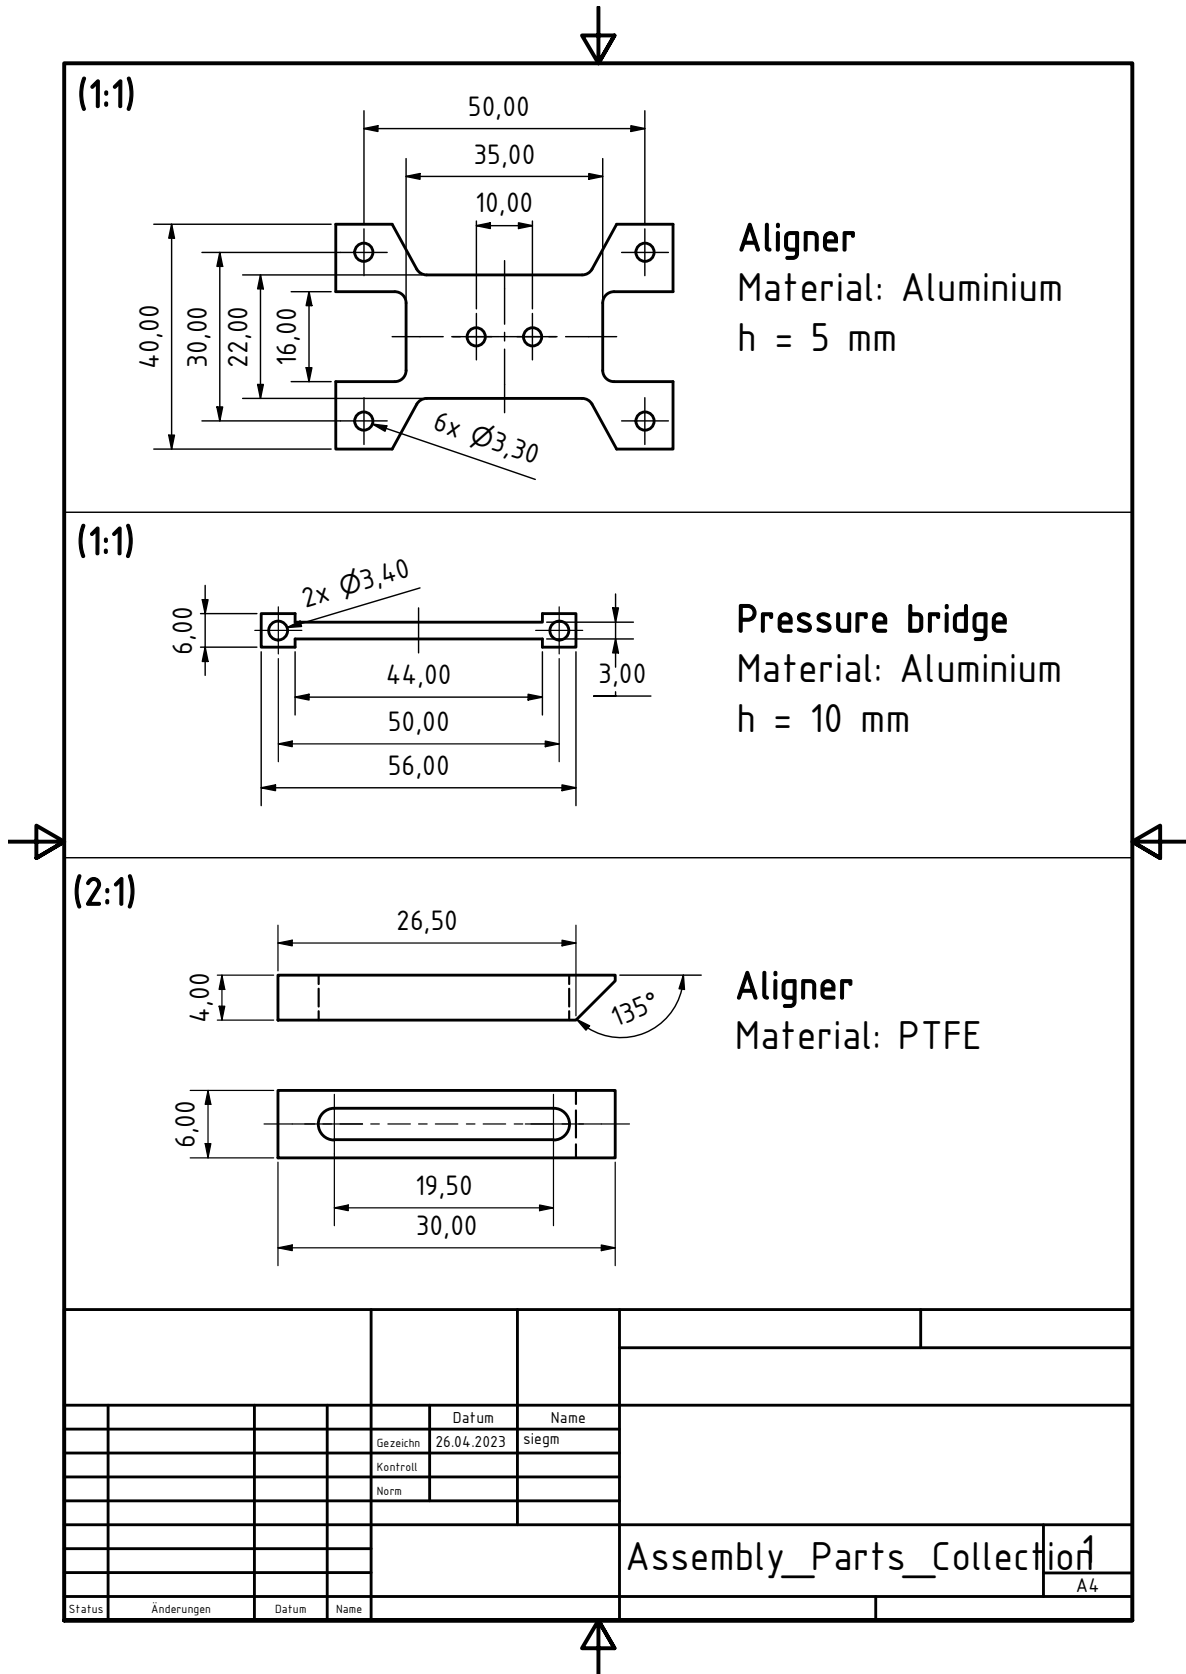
Assembly mechanical drawing - Various assembly helper parts
